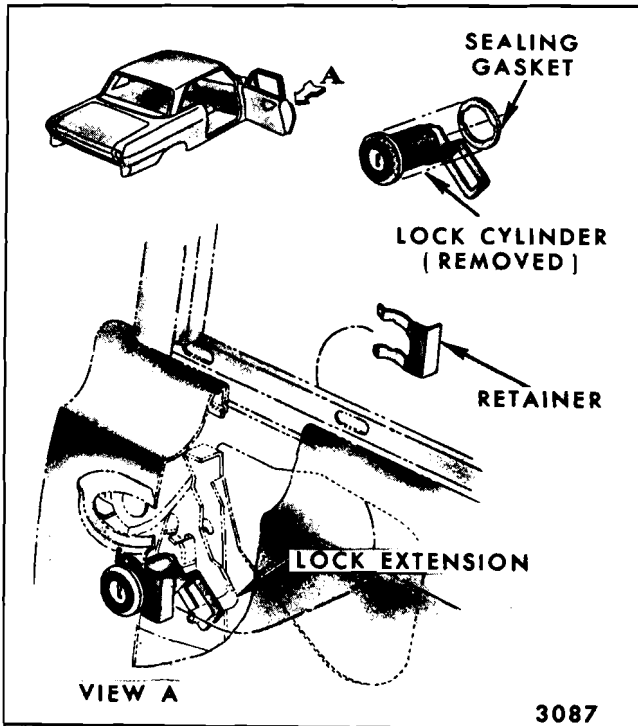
Front Door Lock Cylinder Removal - All Styles
